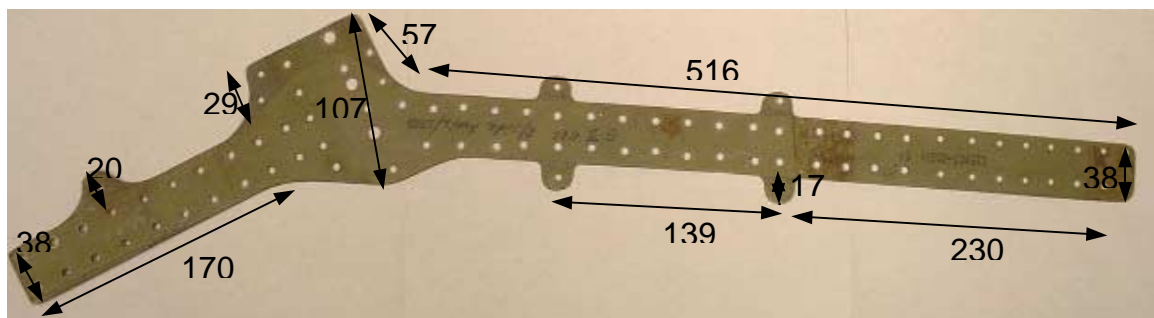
Sample # 6. Corrosion sample; corrosion between skin and frame member.
